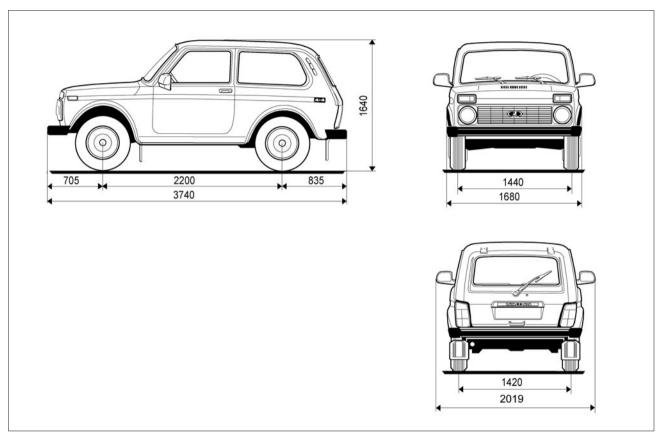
Overall dimensions of VAZ-21214 car model and its versions
